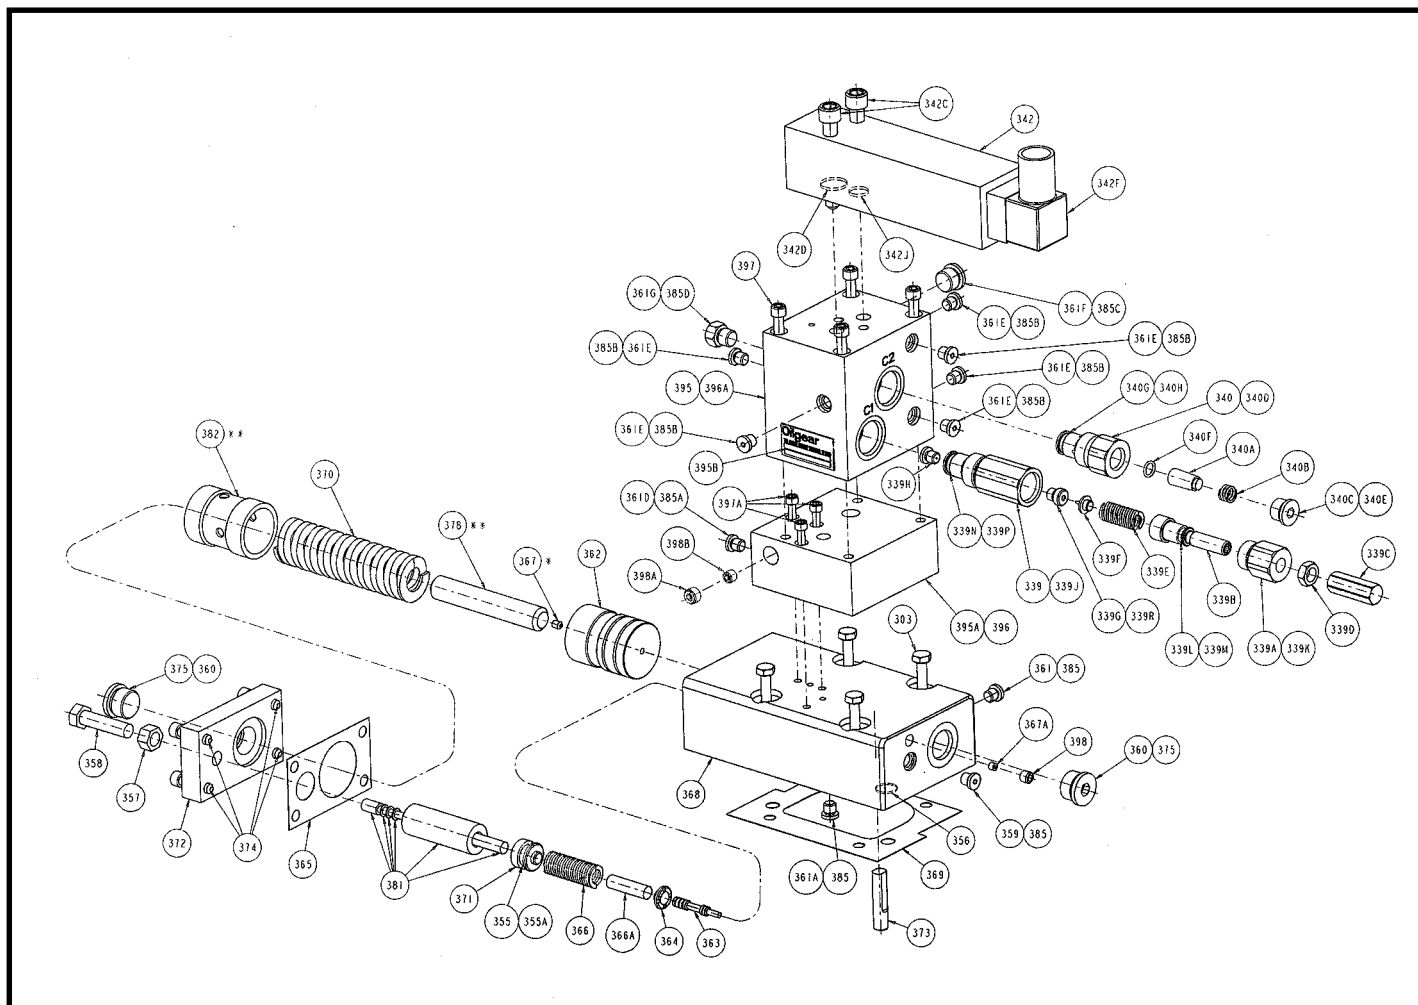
Exploded Parts Drawing Oilgear Type "ER" Control (E-51839 sh. 3).
